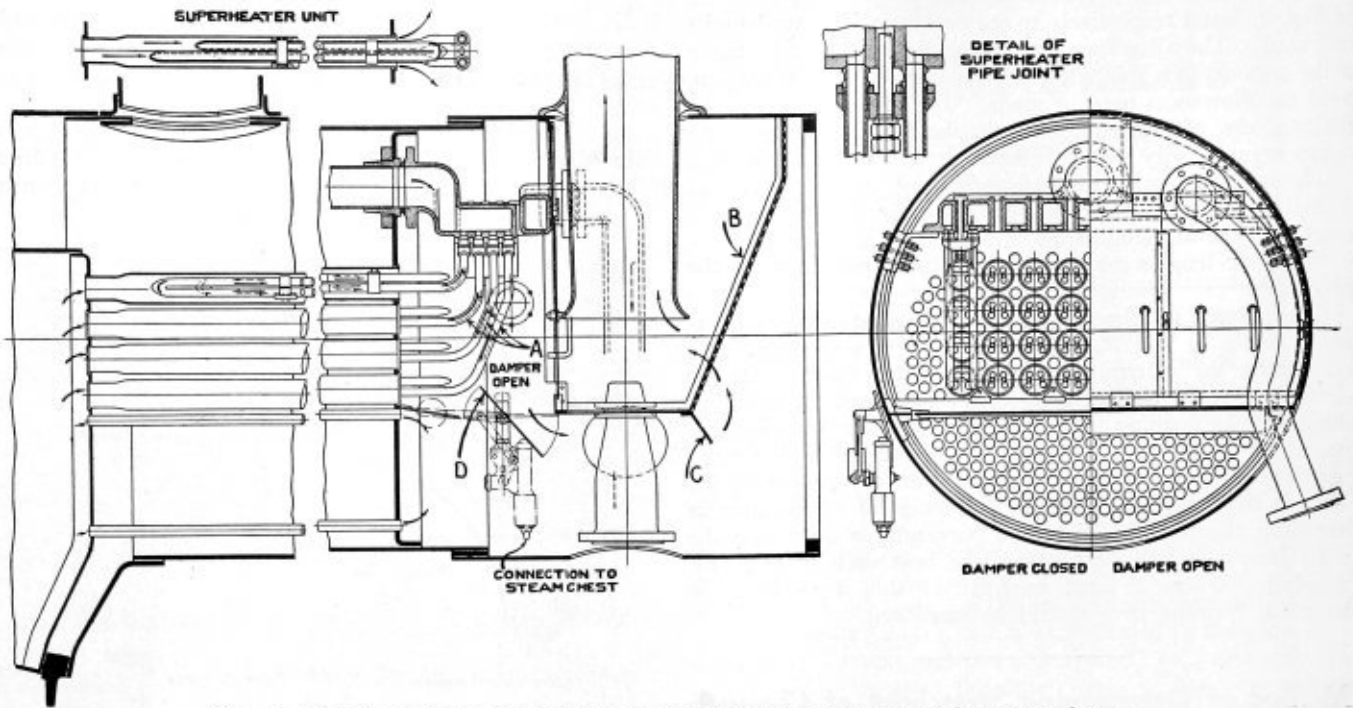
Details of Locomotive Front End Equipped with Through-Bolt Superheater
